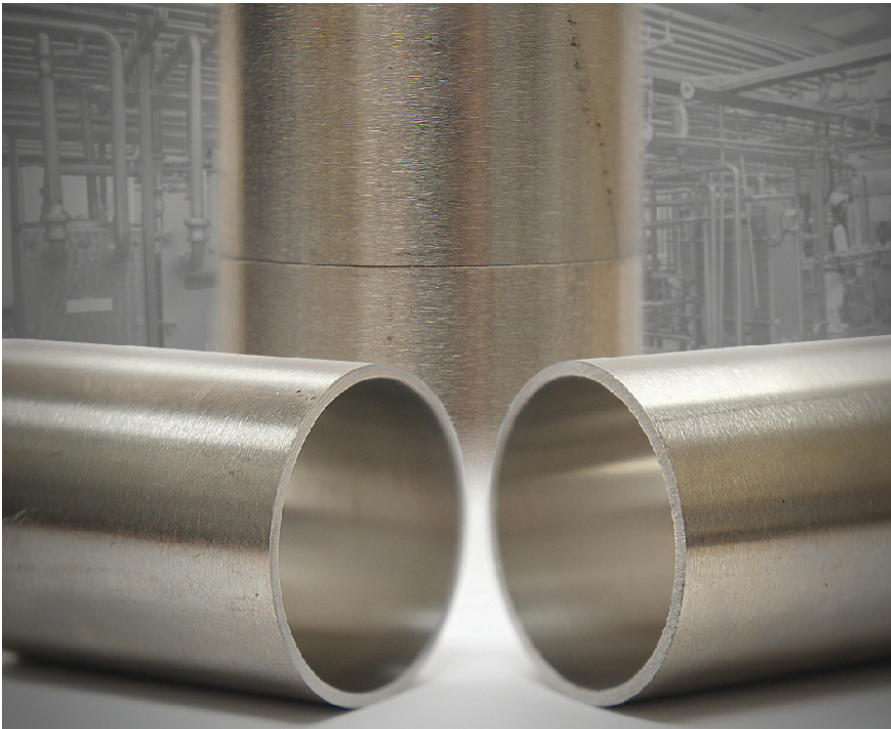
Facing machine tools deliver a perfectly square, burr-free edge with no gaps or misalignments for orbital welding.
